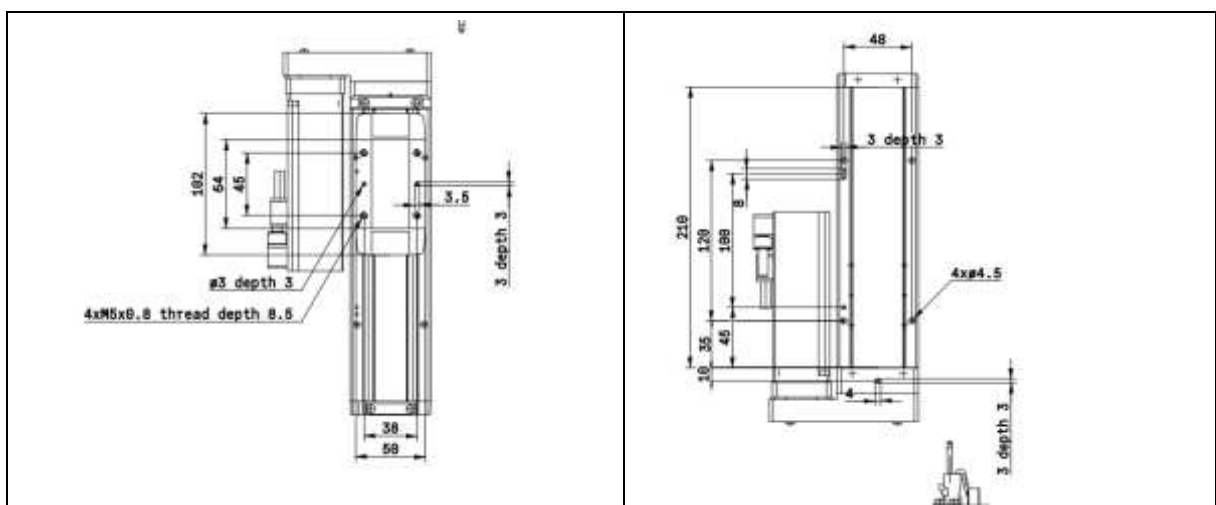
Dimensions LEFS25V6H-100BK-R5M21
